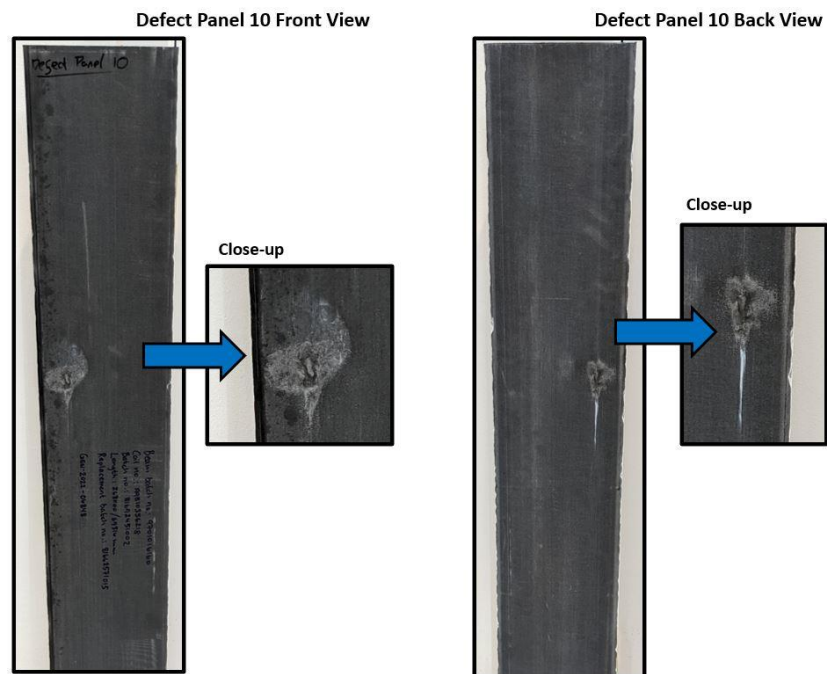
Defect panel 10 with surface defect indications highlighted
